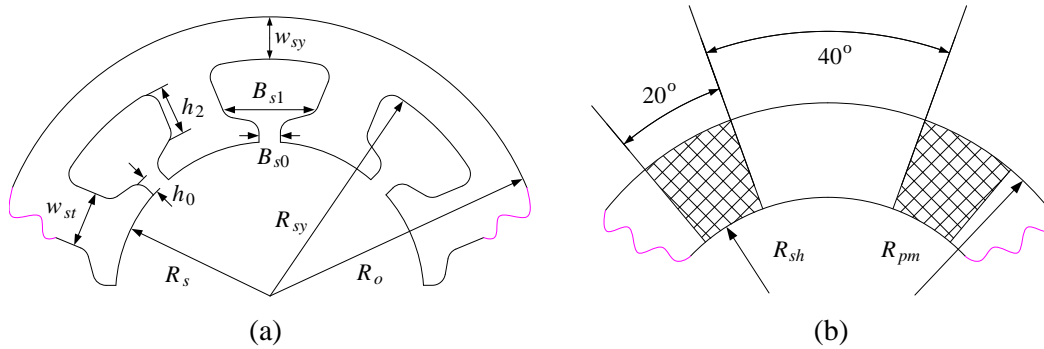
Detail parameters. (a) Stator. (b) Rotor.
